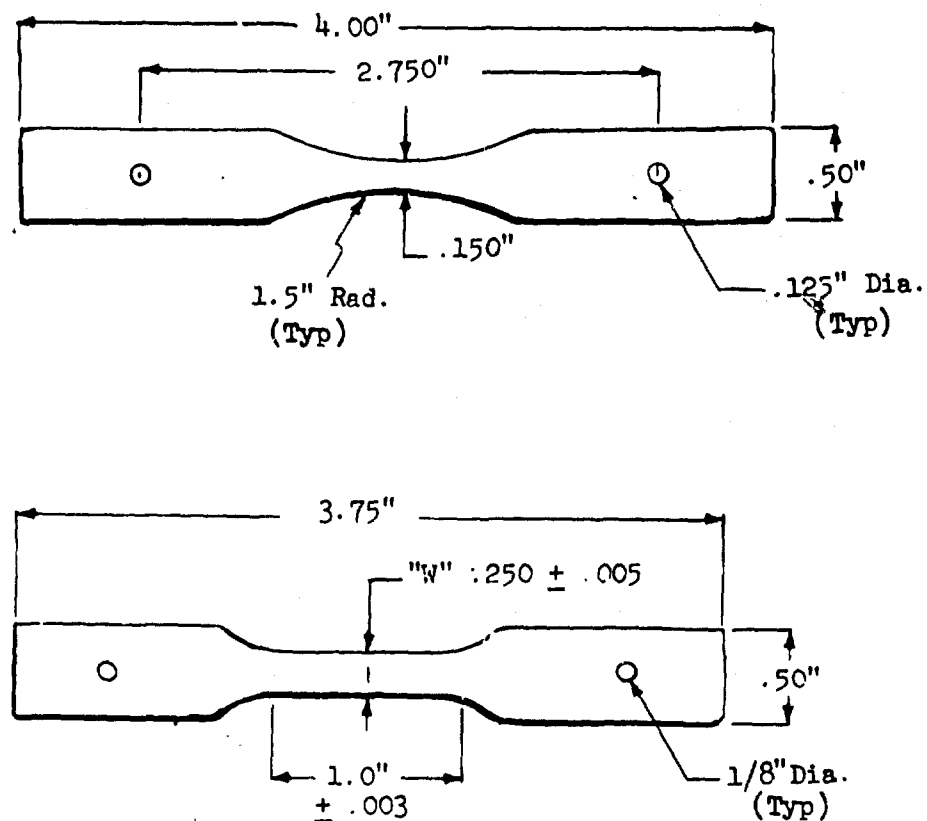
FATIGUE AND TENSILE SPECIMEN DIMENSIONS
